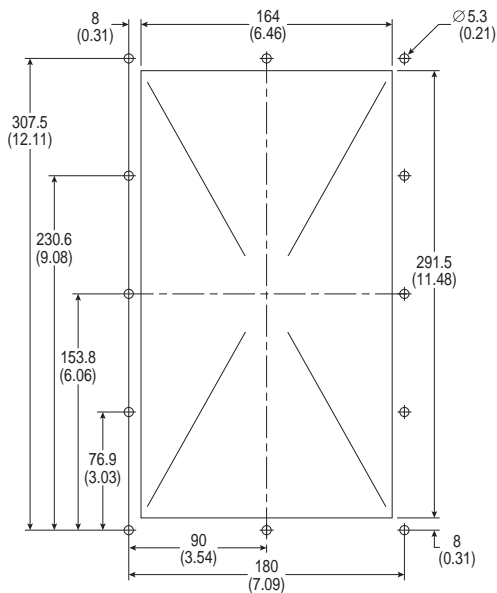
PowerFlex 40 Flange Mount Drives – Dimensions are in millimeters and (inches)
